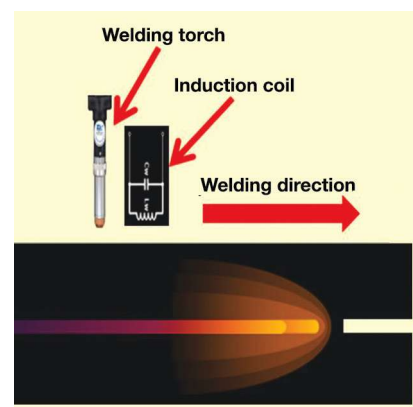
Schematic diagram of the HiDep welding process.
